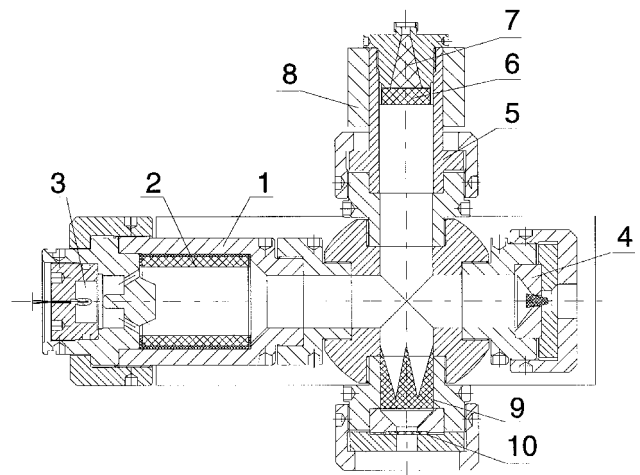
Test motor assembly. 1, Chamber of the gas-generating section; 2, gas-generating charge; 3, igniter; 4, nozzle section; 5, chamber of the measuring section; 6, propellant sample; 7, horn antenna; 8, heat exchanger; 9, microwave absorber; and 10, membrane section.
